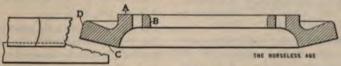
DRIVING BLANK AND ROUGHING TOOL.
